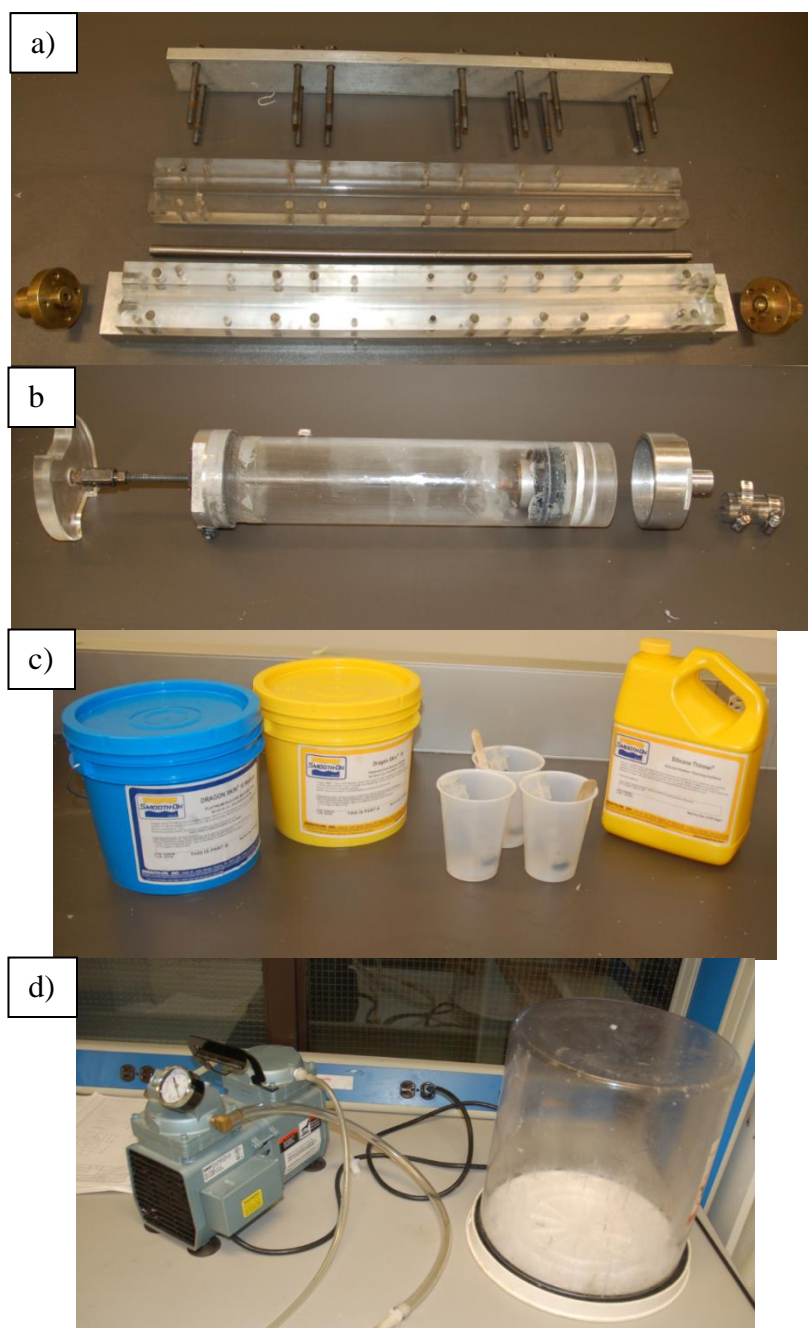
Equipment for pipe casting: (a) Mould with center rod and brass fittings, (b) plexiglas piston with connecting tube, (c) Dragon Skin parts A & B and solvent, and (d) vacuum pump and chamber.
